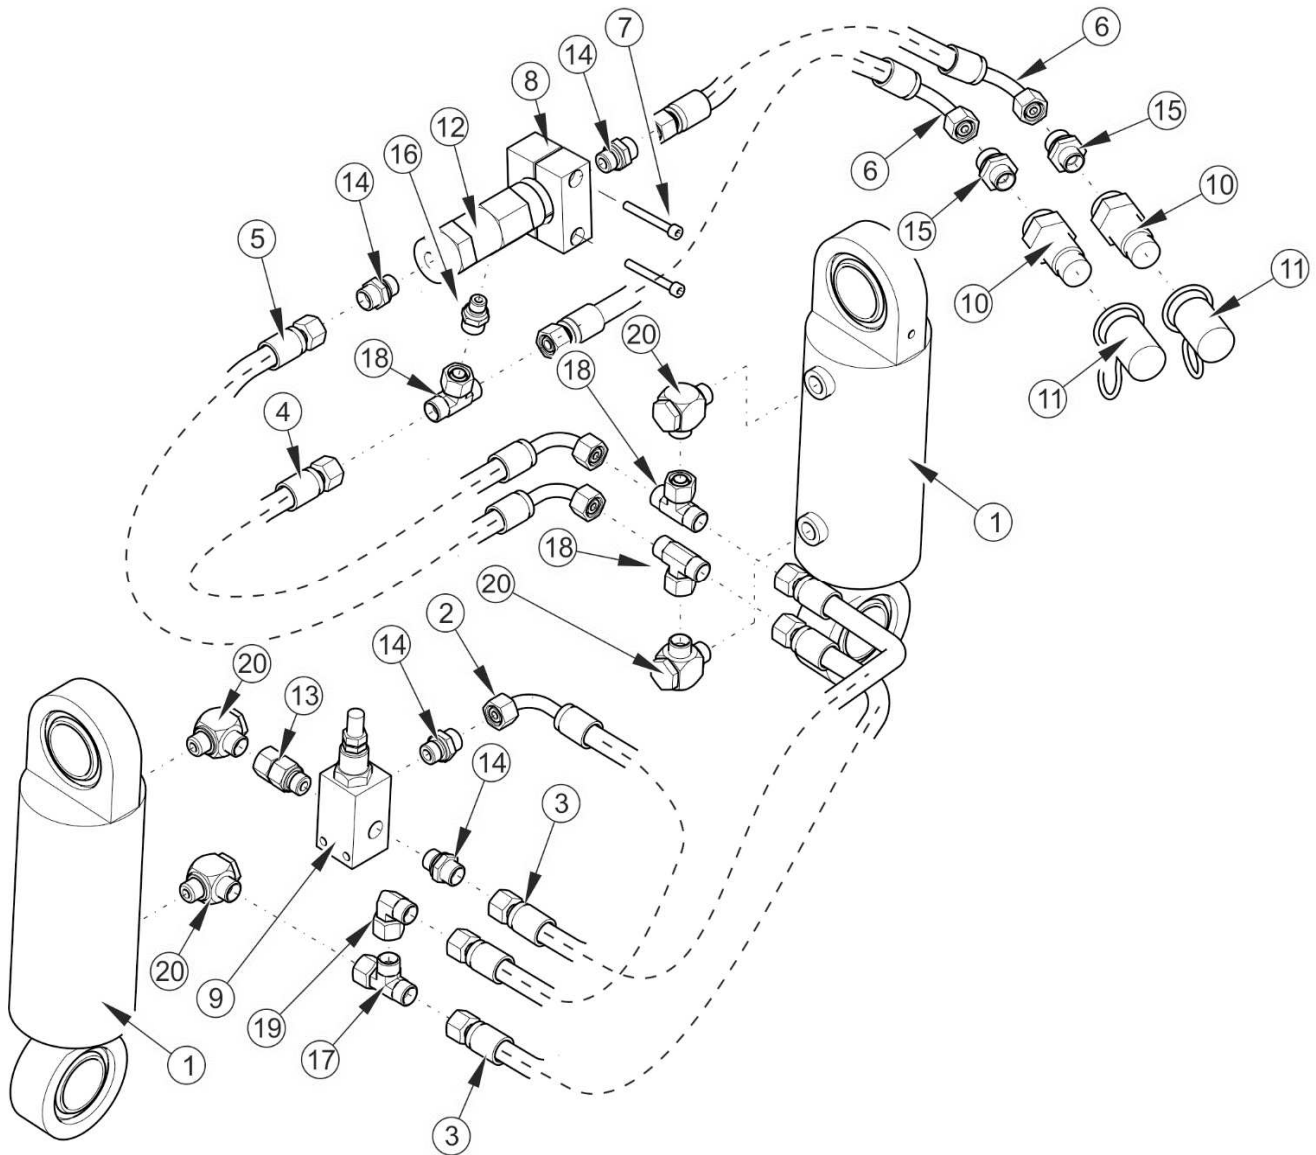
Mounting the cylinders and cylinder tilt interlock
